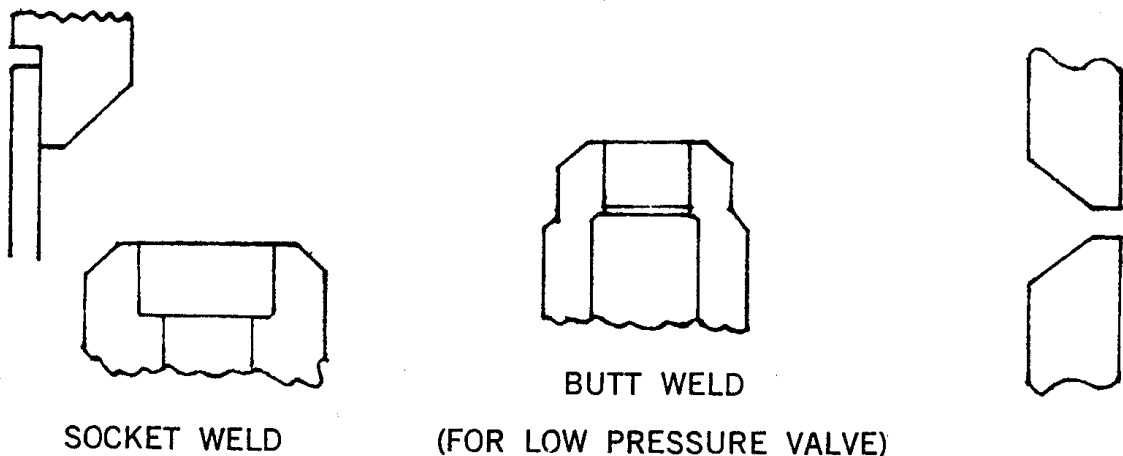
End connections for socket weld and butt weld joints.
